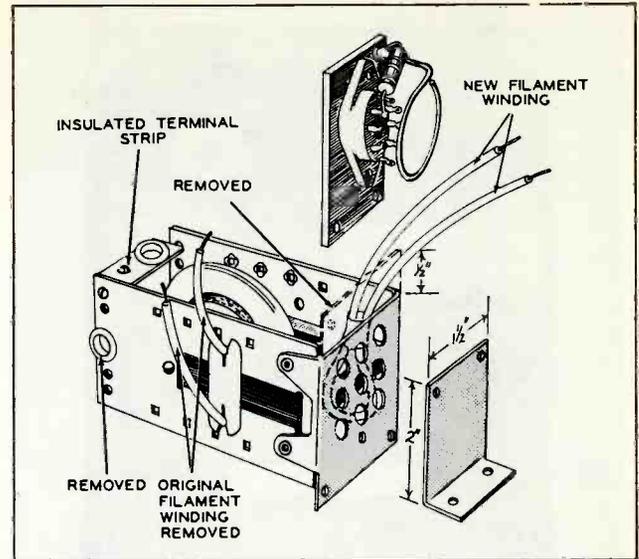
Construction Detail of Horizontal Transformer and HV Rectifier Mounting Brackets.
